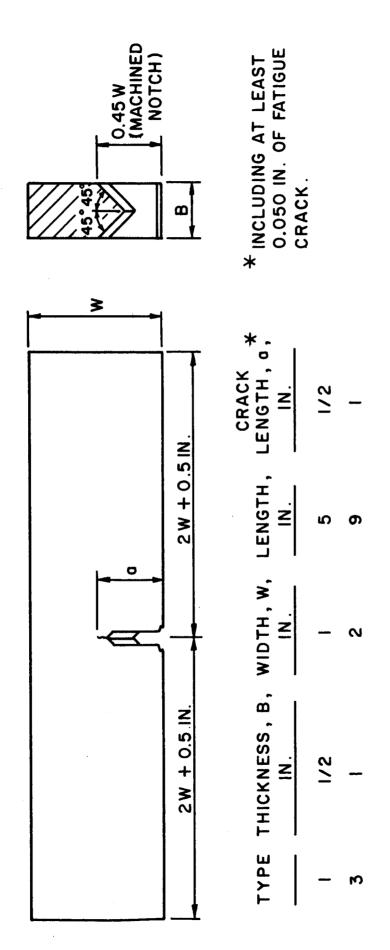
FATIGUE-CRACKED NOTCHED-BEND FRACTURE-TOUGHNESS SPECIMEN.
